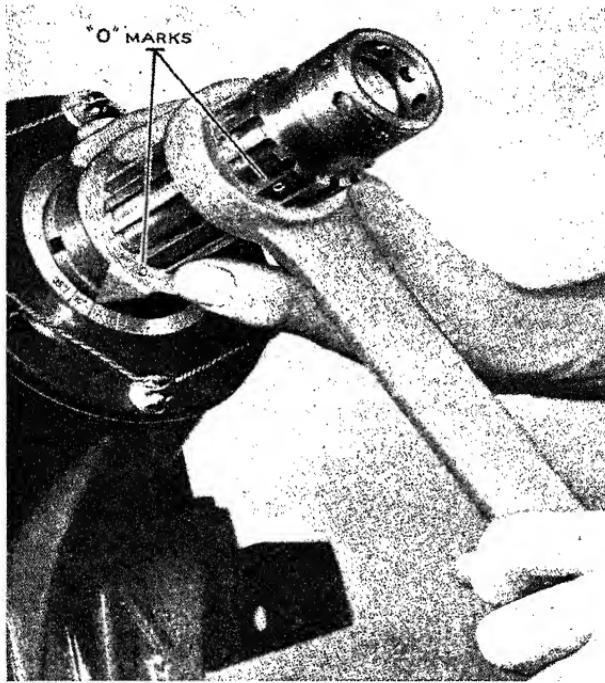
Using the magneto timing pointer on the crankshaft.
